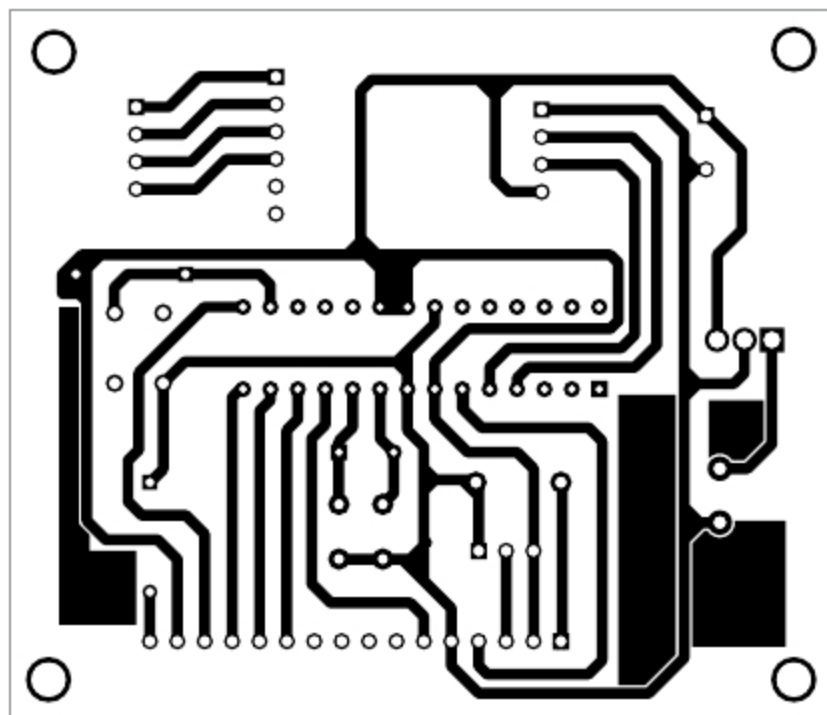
Actual-size PCB layout of the weighing machine circuit
